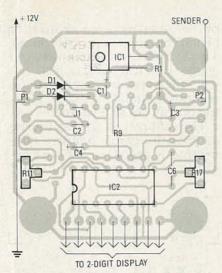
OIL-PRESSURE GAUGE partsplacement.
